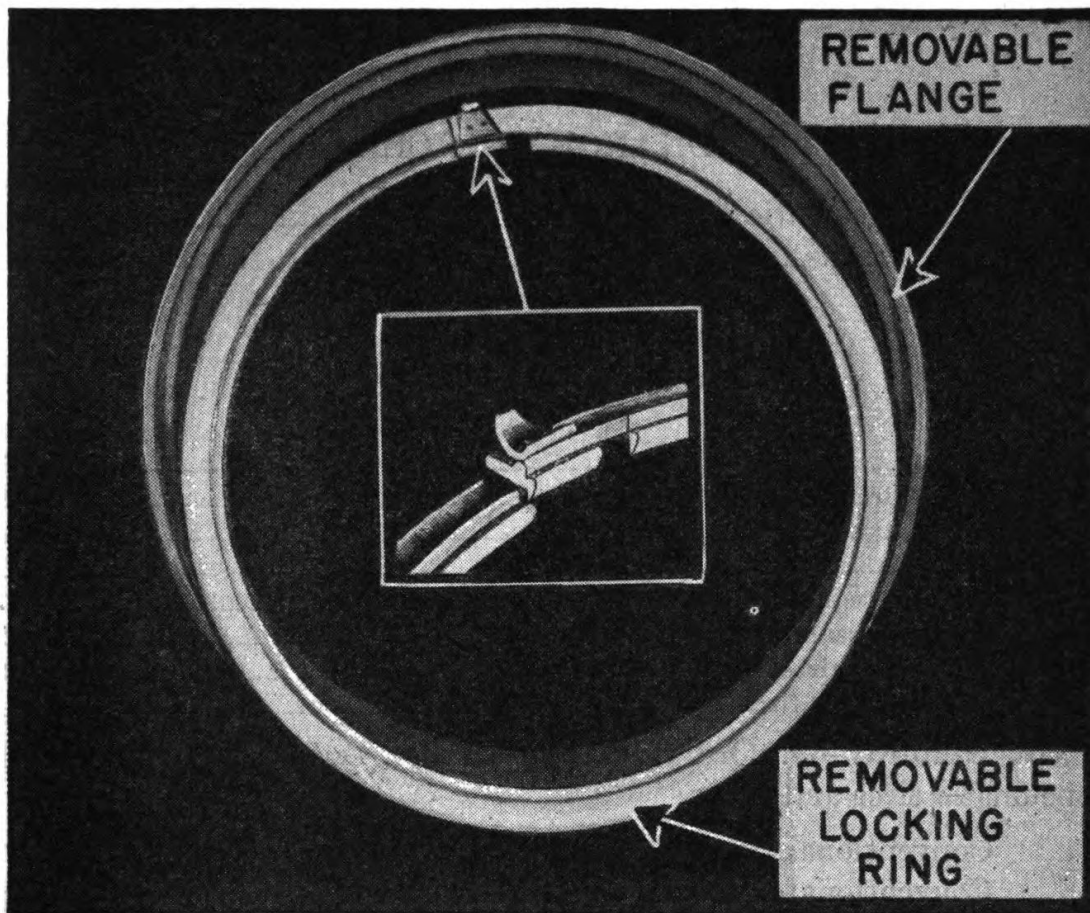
Two-piece-ring removable flange, locking ring riveted on.
